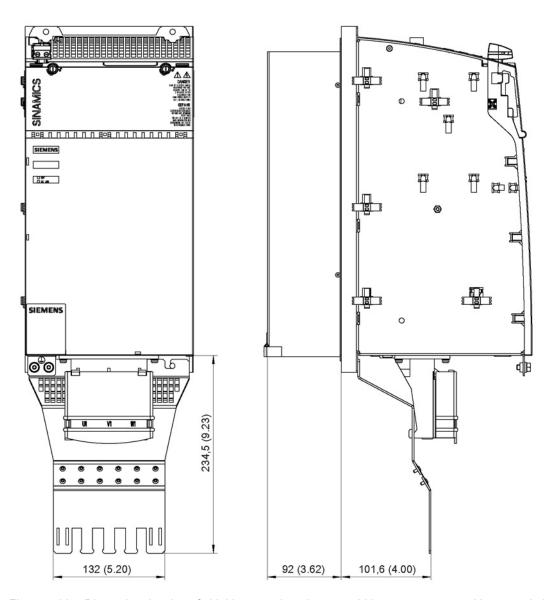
Dimension drawing of shield connecting plate on a 200 mm component with external air cooling, all dimensions in mm and (inches)
